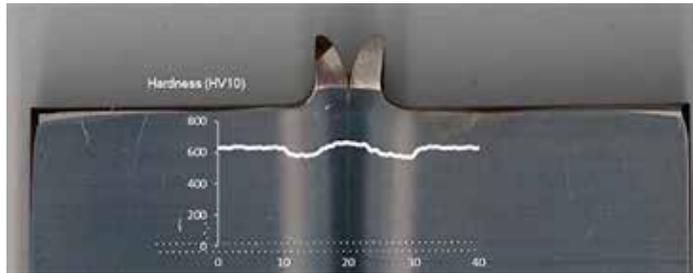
Friction welded hybrid steel (welded and aged).
